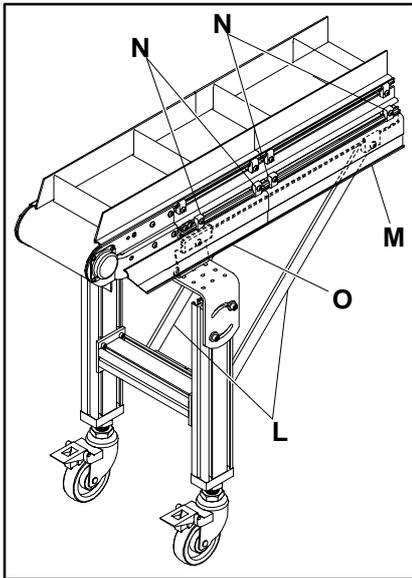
Aluminum Stand (with Casters and Diagonal Braces) Supporting Cleated Belt Conveyor with Return Belt Skirting
